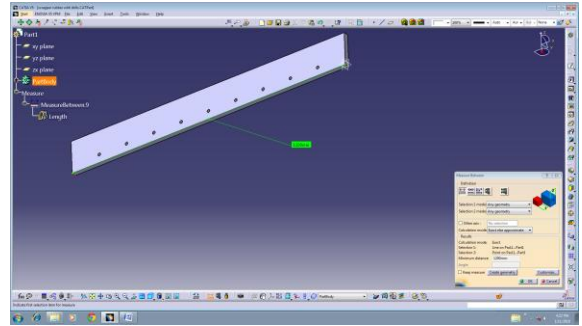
General Arrangement Drawings of Scraper Rubber
